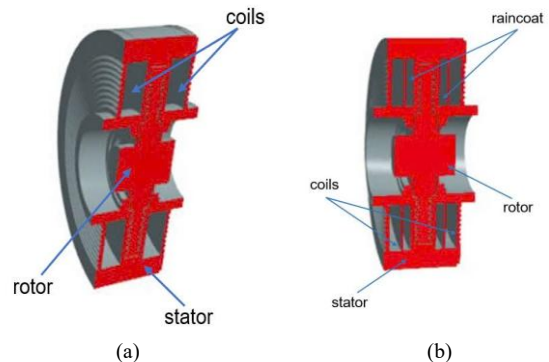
Cross-section of the 7-tooth brake (a) without water jackets; (b) with water jackets.
